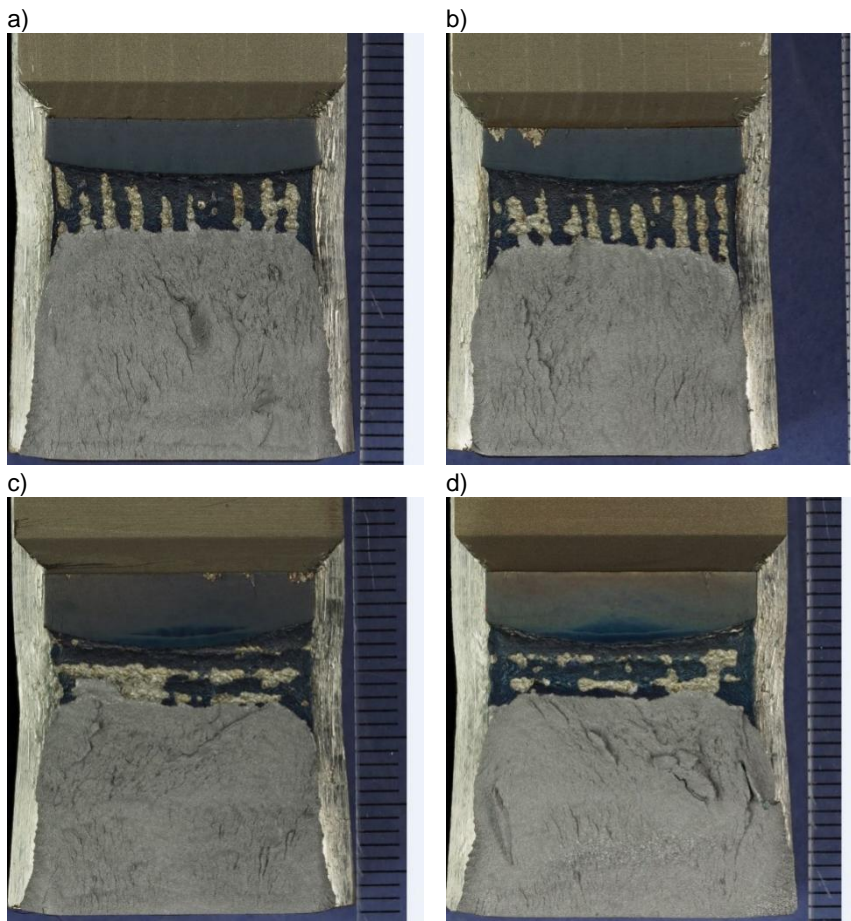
Photographs of fracture surfaces of the J-R test specimens, tested in 10000 h aged condition in T-L orientation, a and b, and T-S orientation, in c and d. Crack initiates in LAS, after which it deflects to the weld metal side and occasionally back to LAS side.
